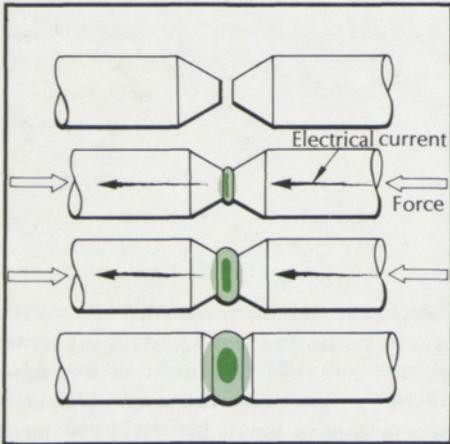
The process of upset welding. The two metal parts to be joined are clamped together and an electric current passed through them. Rapid heating is accompanied by deformation.
